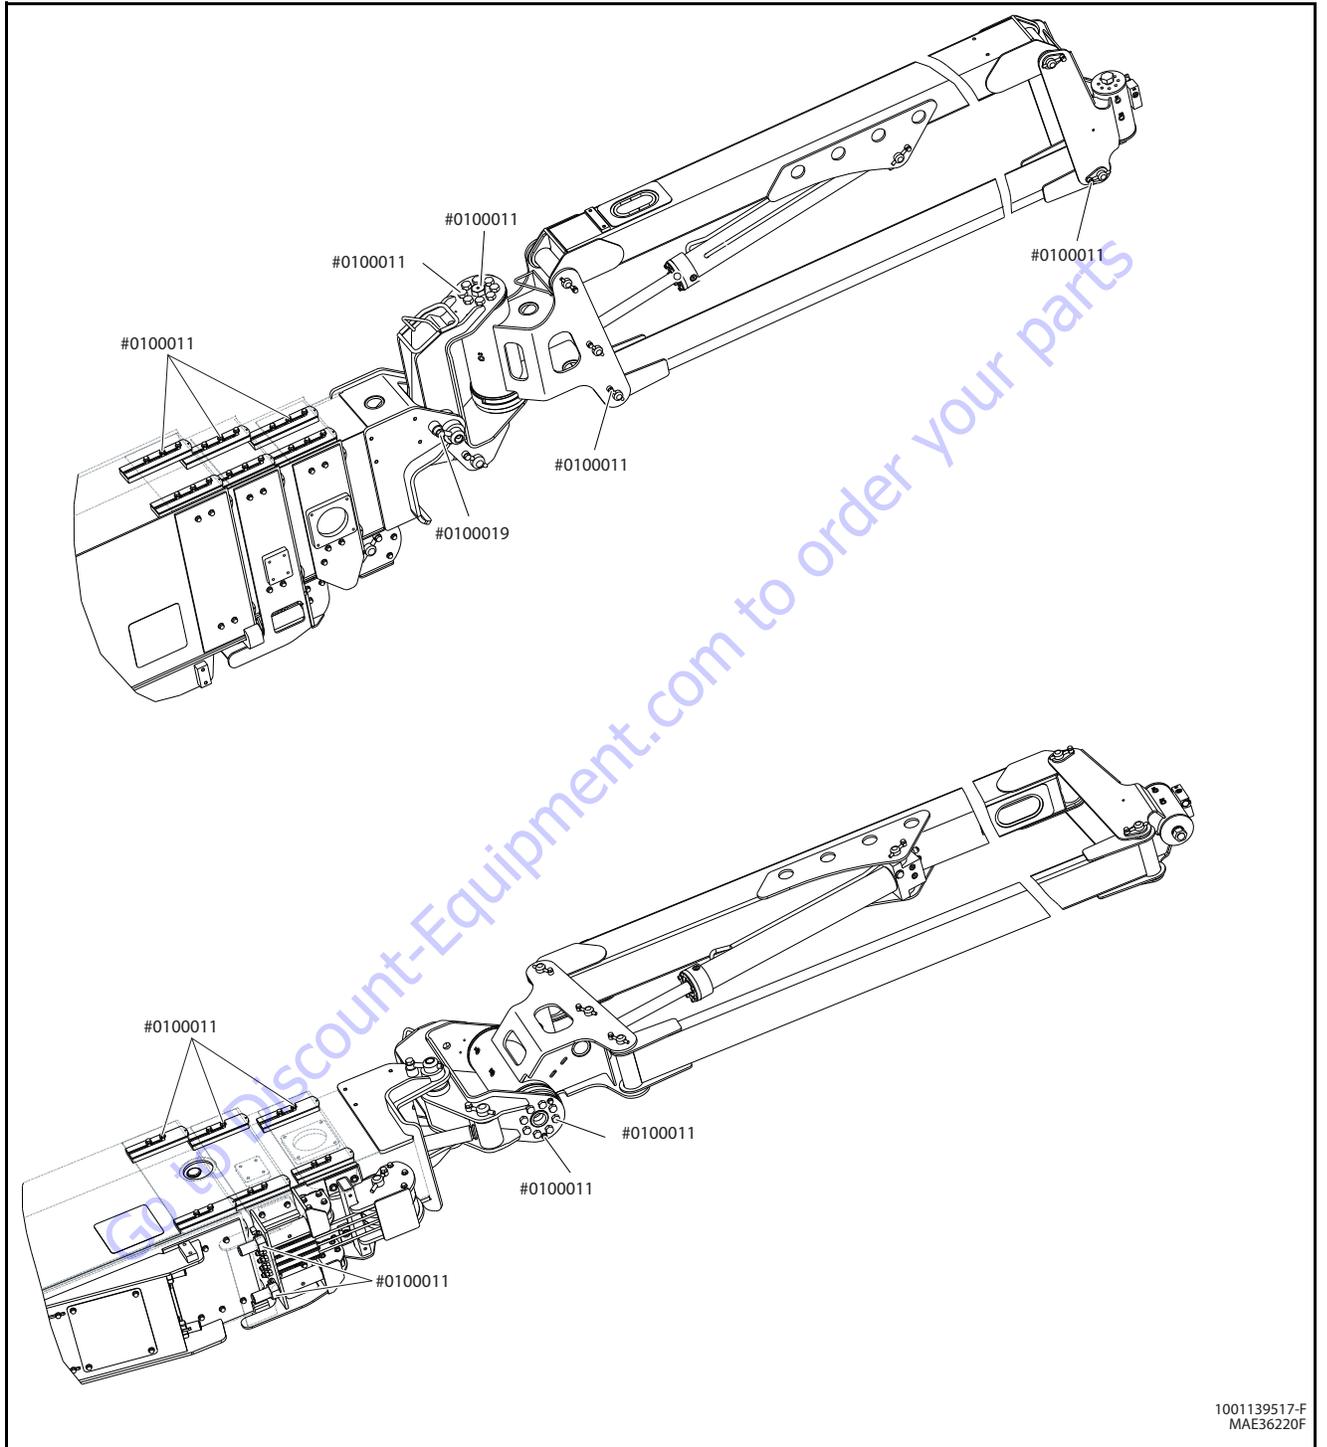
Locations for Threadlocker Application - Sheet 4 of 4
